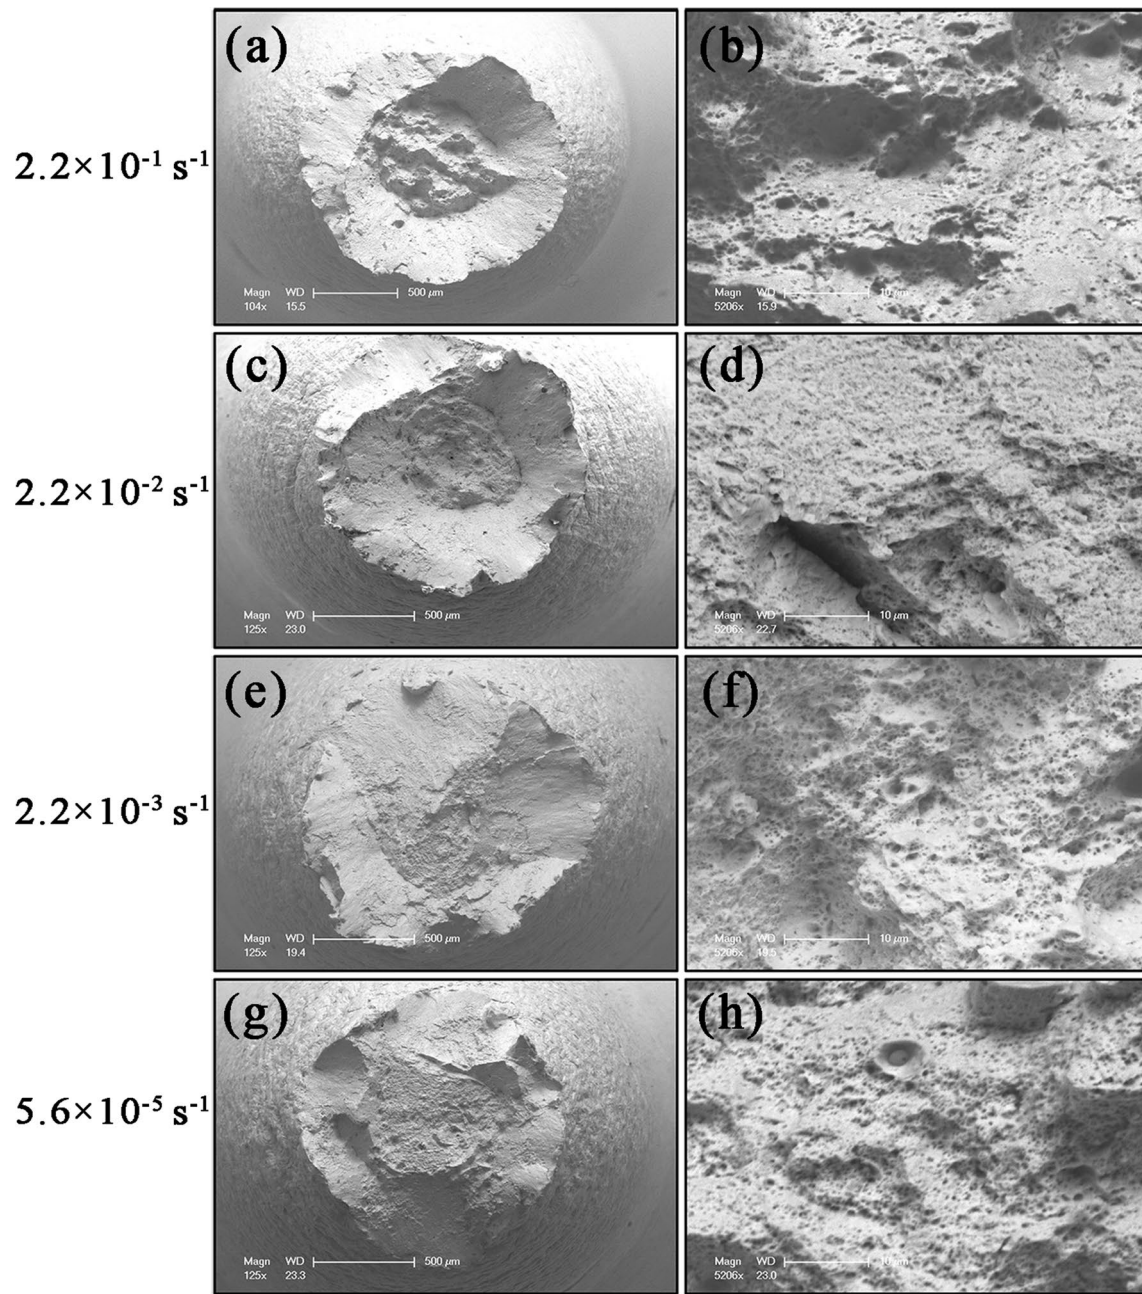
Fracture surfaces of SLM-produced parts at different strain rates
